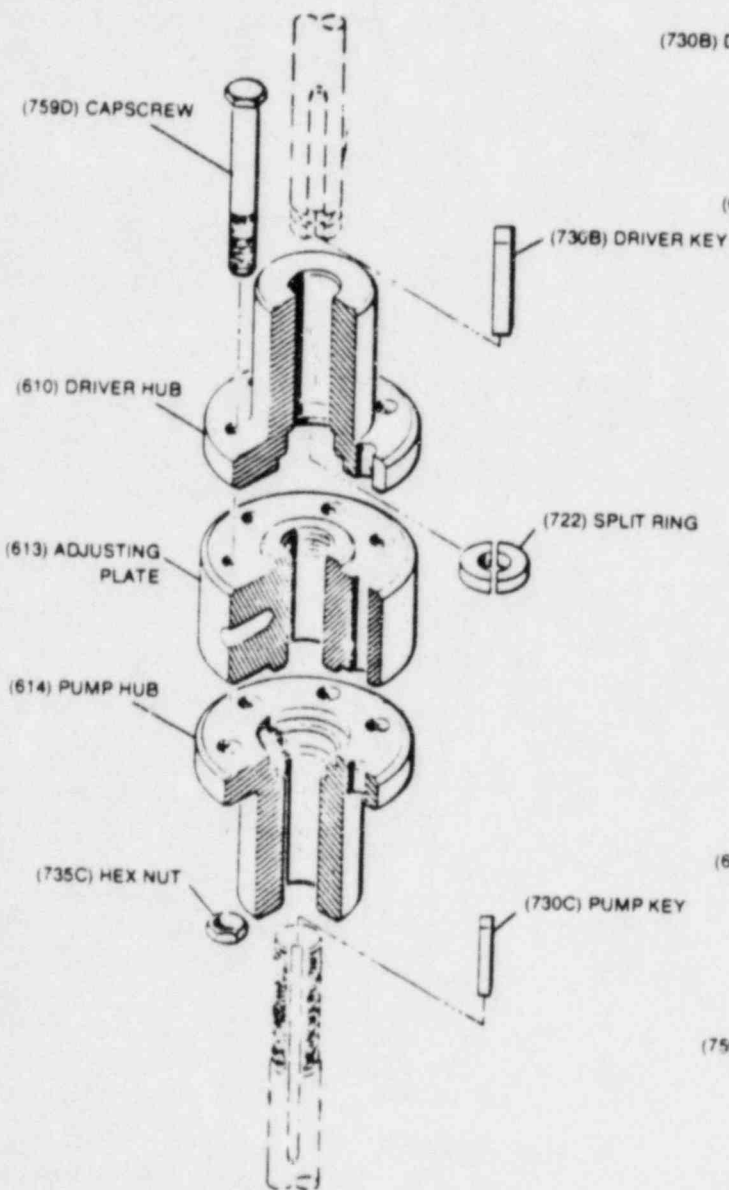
FLANGED ADJUSTABLE COUPLING
